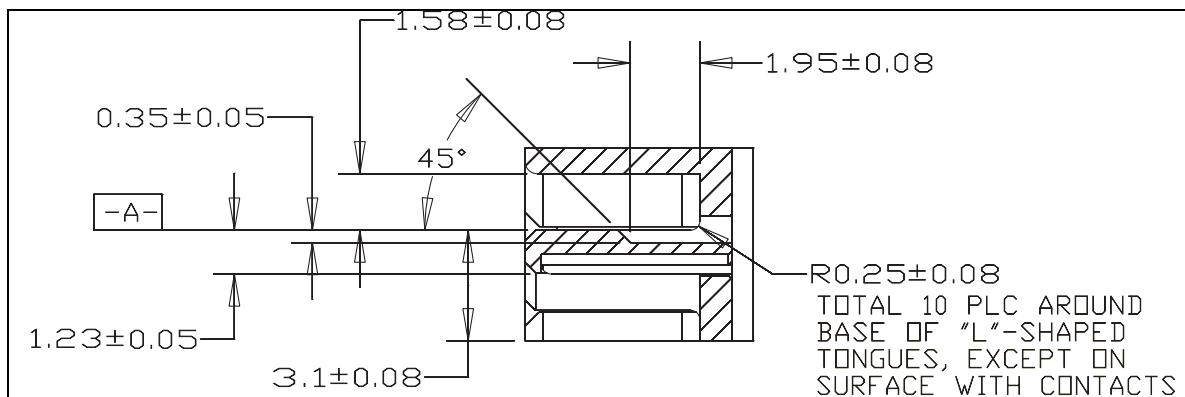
Slimline device plug connector interface dimensions (section A-A)
